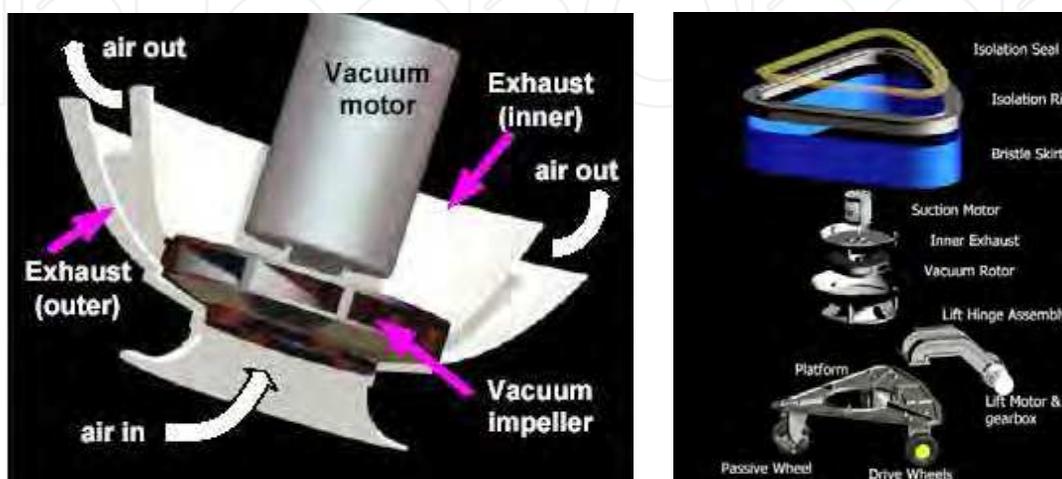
Vacuum rotor package to generate aerodynamic attraction (left) and exploded view of the City-Climber prototype-II (right) (Elliot et al. (2006))
